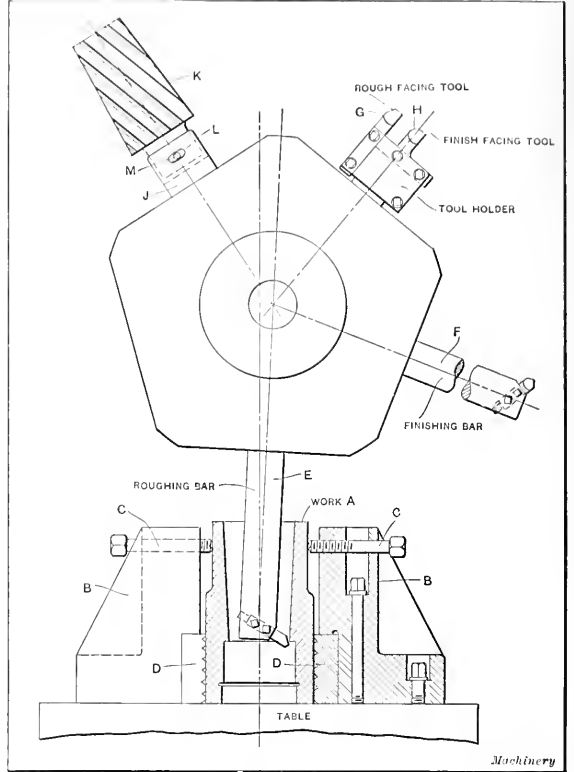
Attachments for Vertical Turret Lathe and Vertical Boring Mill
